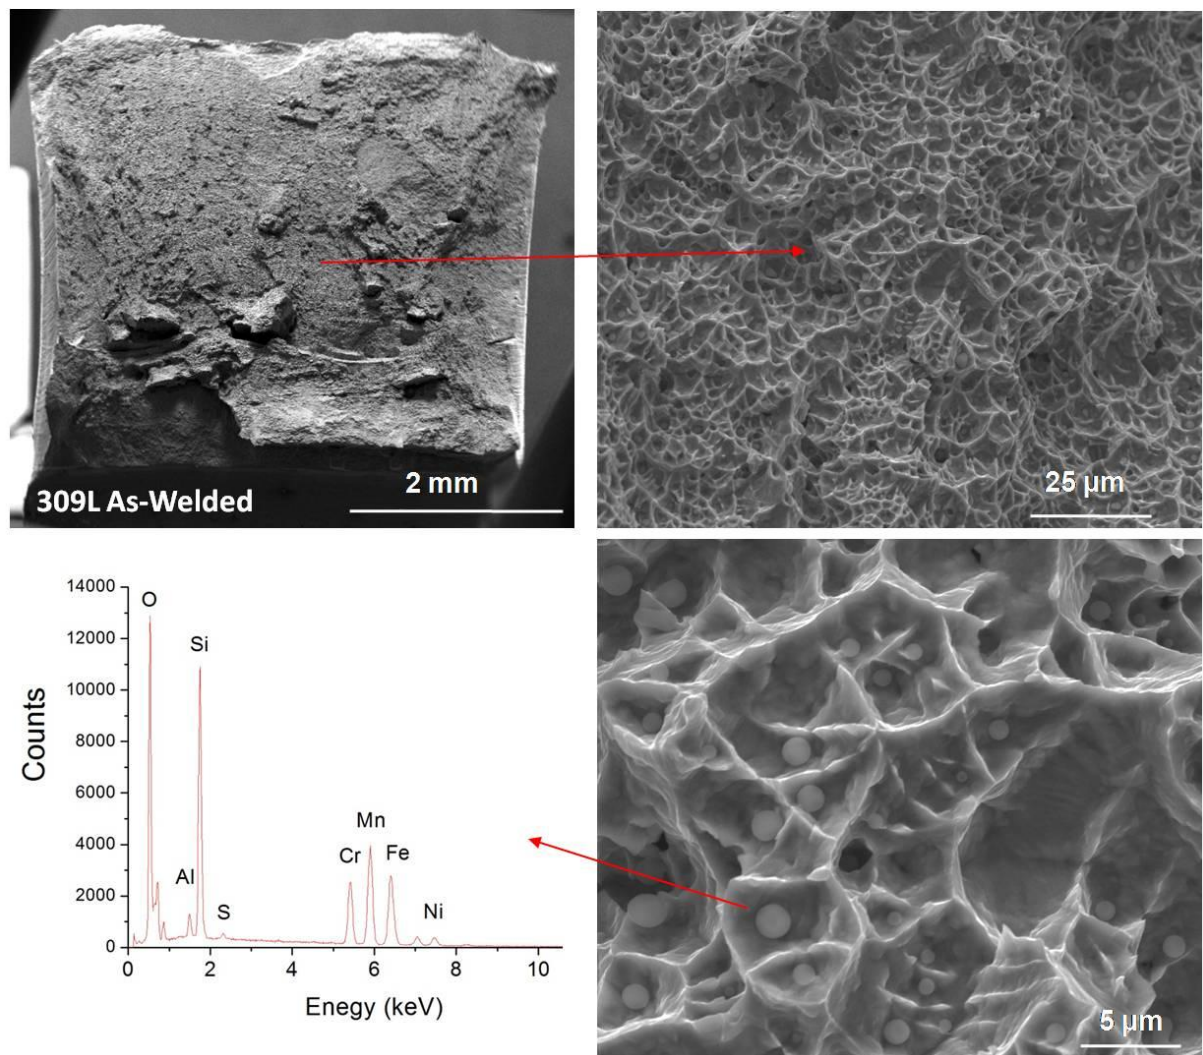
Fractography of 309L in the as-welded condition
